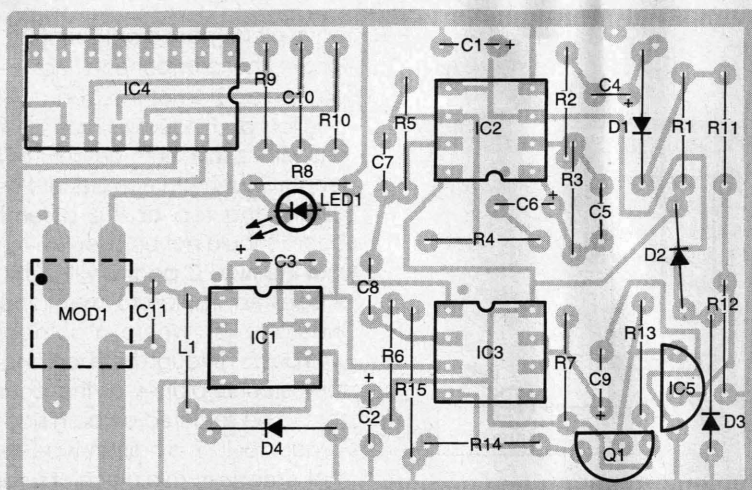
Here is the parts-placement diagram for the Guardian's transmitter. A single-sided PC board makes the Guardian a surprisingly easy project to build. Only MOD1 is surface-mounted to the solder side of the board.
